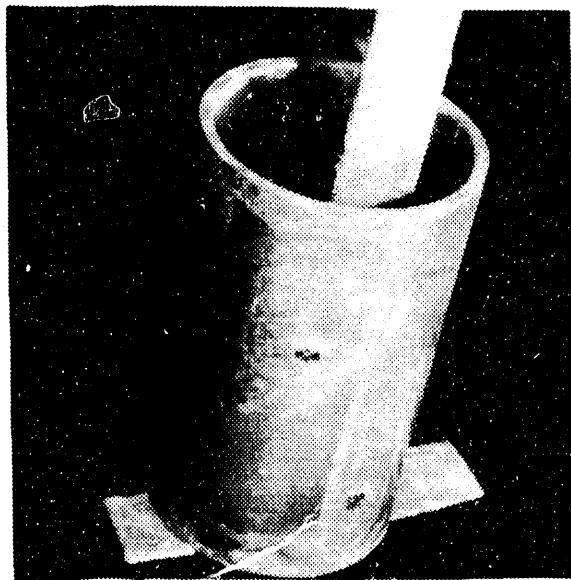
Typical pitting corrosion on 8001 aluminum tube.
